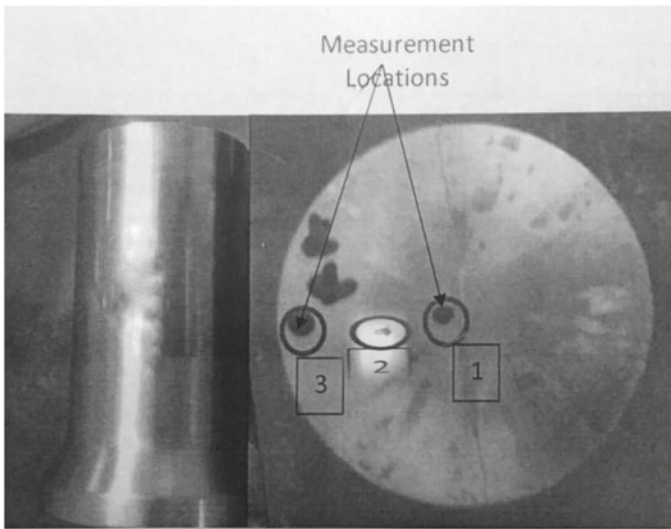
Photograph of the counter punch tool cracked along the diameter
